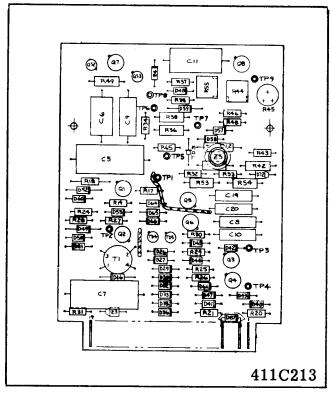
Printed Circuit Board Assembly for SDG Relay
